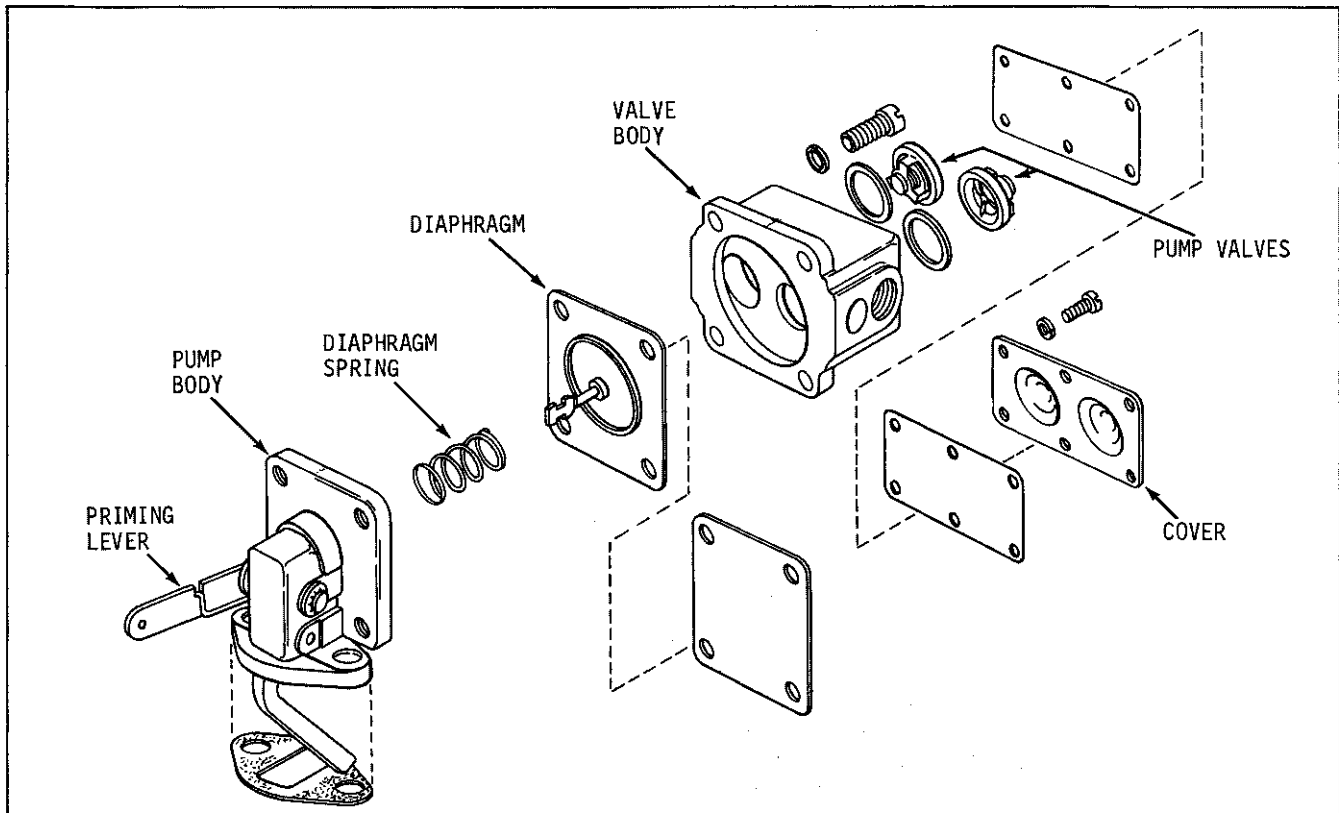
DISASSEMBLED VIEW, FUEL PUMP (K662)
